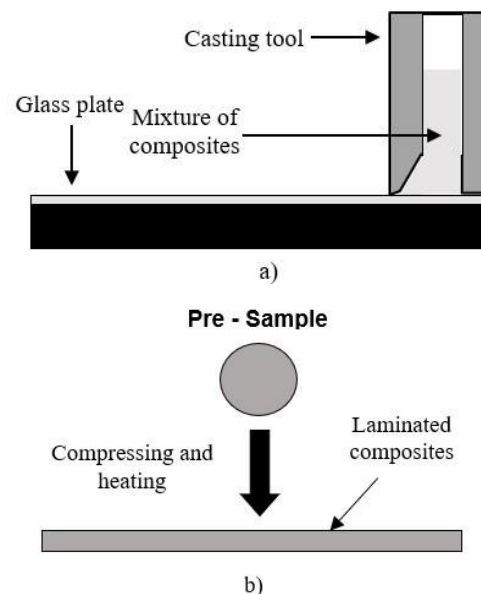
Schematic of (a) solution casting And Compression molding (b)
